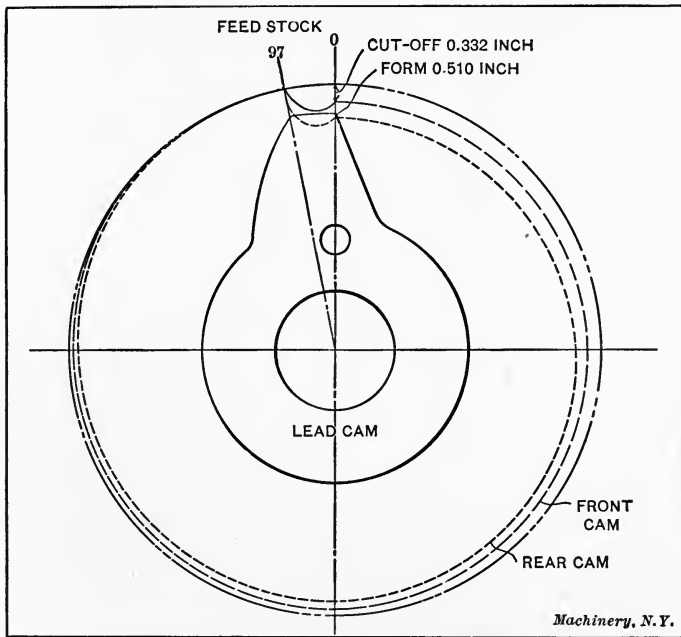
Cams for Making the Piece shown in Fig. 3 by the Method shown at B
